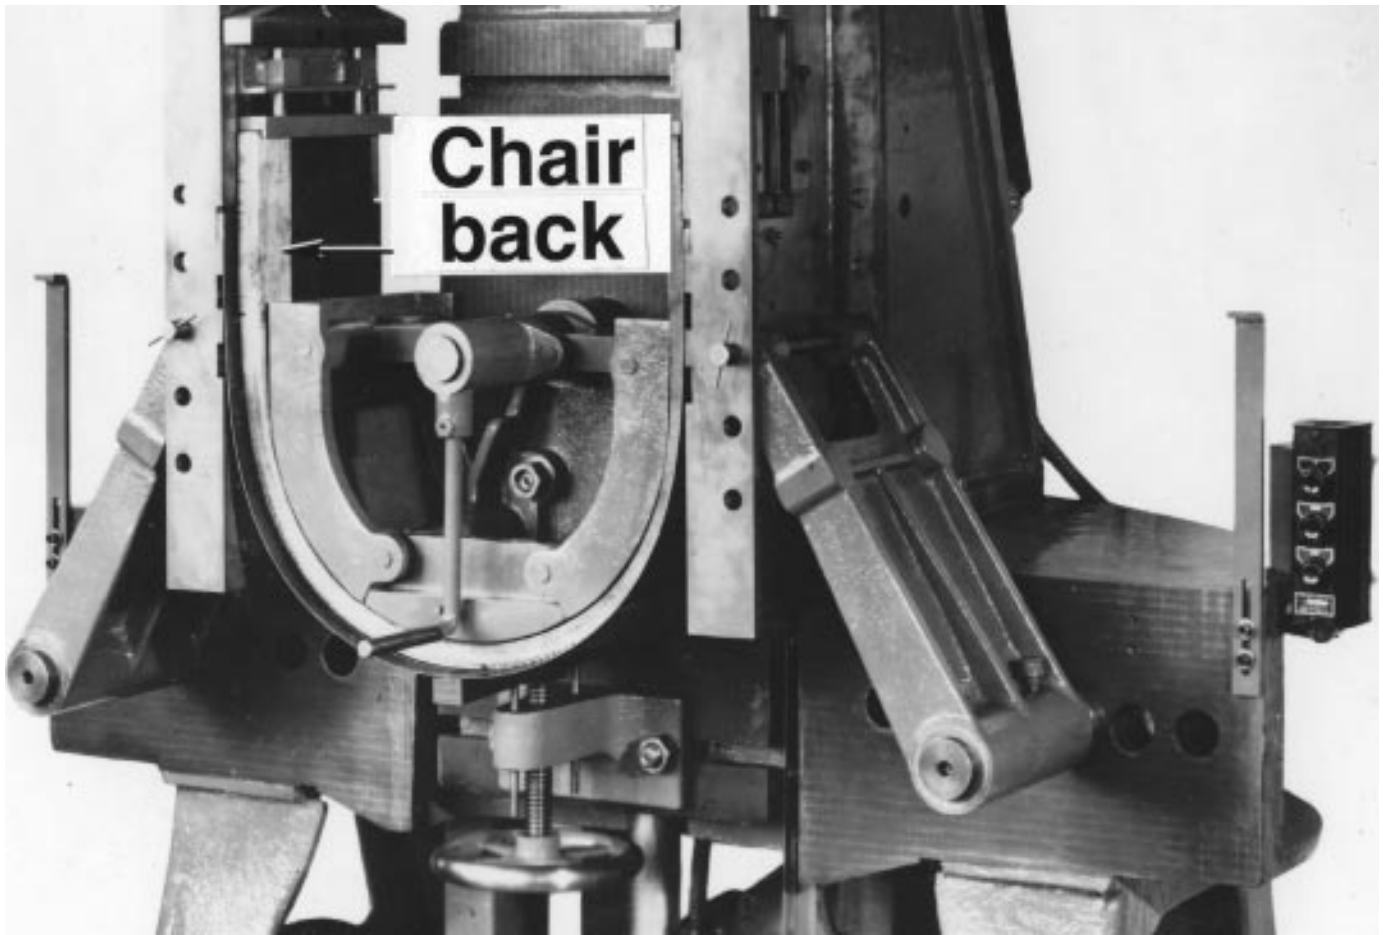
Chair back being bent through an arc of 180° in a bending machine.
